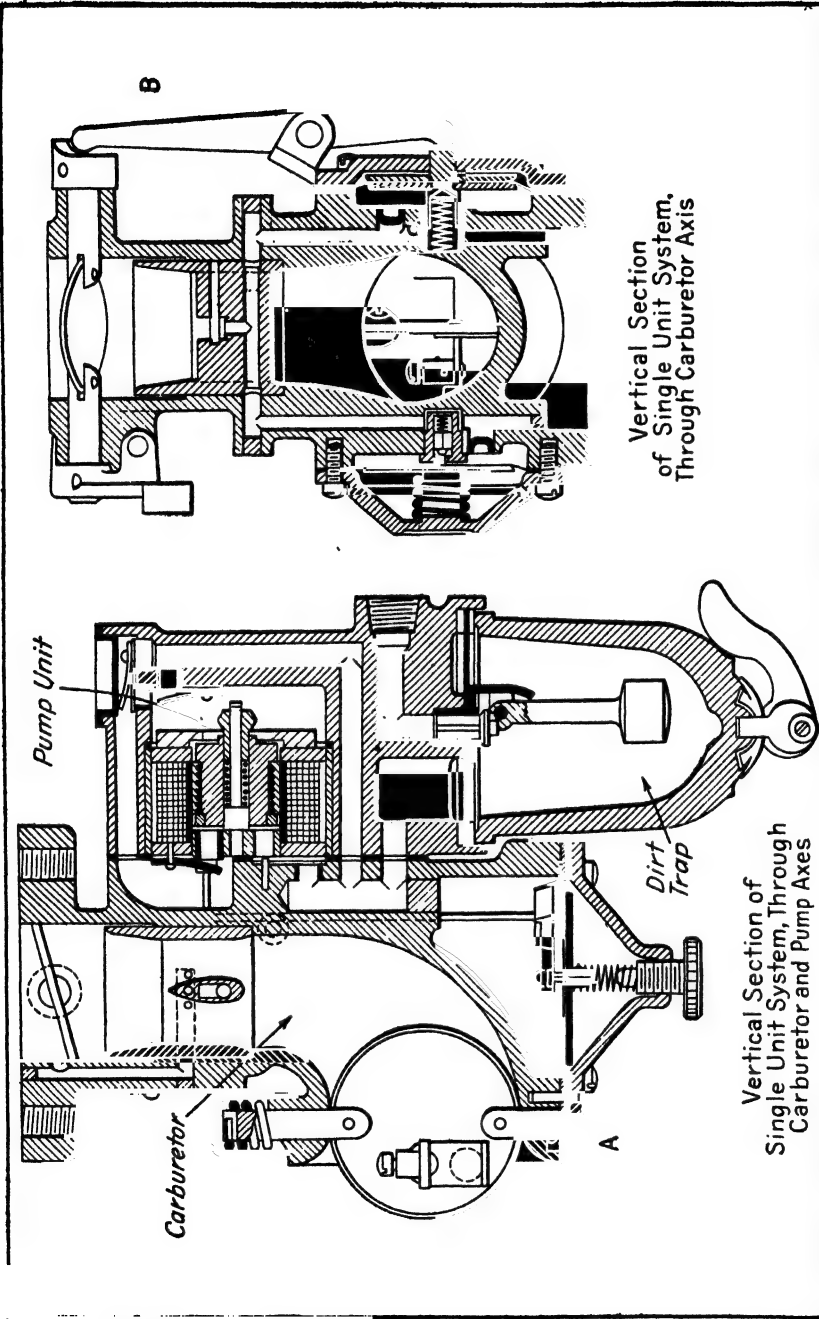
Stewart Carburetor at A, Combining Electrical Fuel Pump and Filtering Device in a Single Unit. Vertical Section of Single Unit System, Through Carburetor Axis Shown at B.
